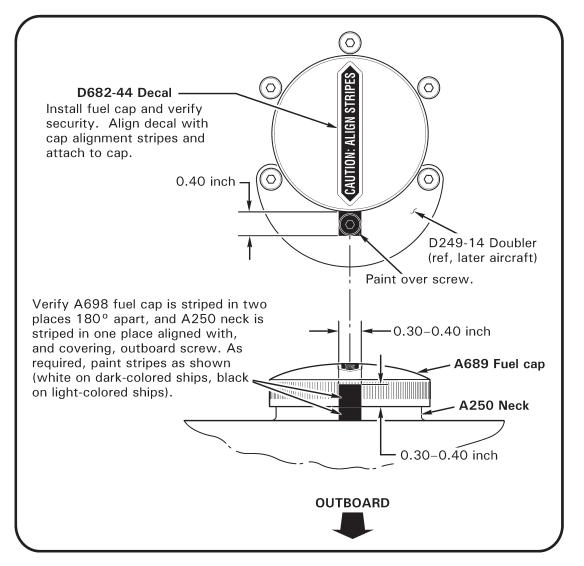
B FUEL CAP ALIGNMENT STRIPES
